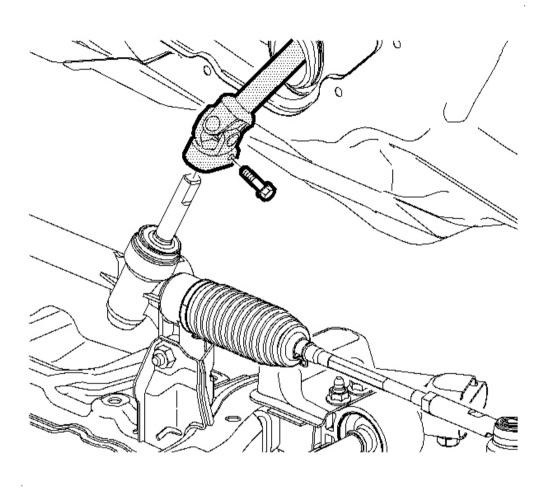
Lower Intermediate Steering Shaft & Pinch Bolt Courtesy of GENERAL MOTORS CORP.
